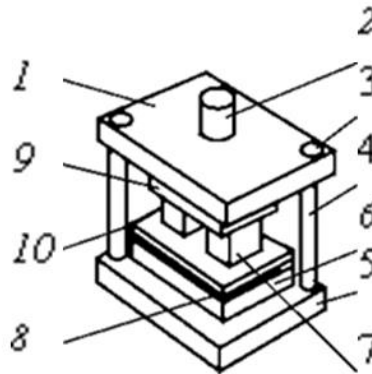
Typical schemes for cutting and drawing dies Die-cut stamp dies
